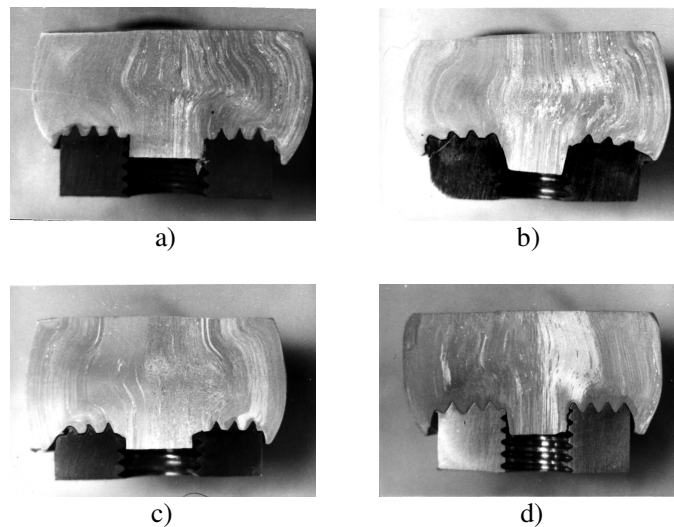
Macroscopic images of different samples of cold welding on cogged surfaces at 50% aluminium deformation rate: a) Al-steel; b) Al-Cu; c) Al-brass; d) Al-stainless steel
